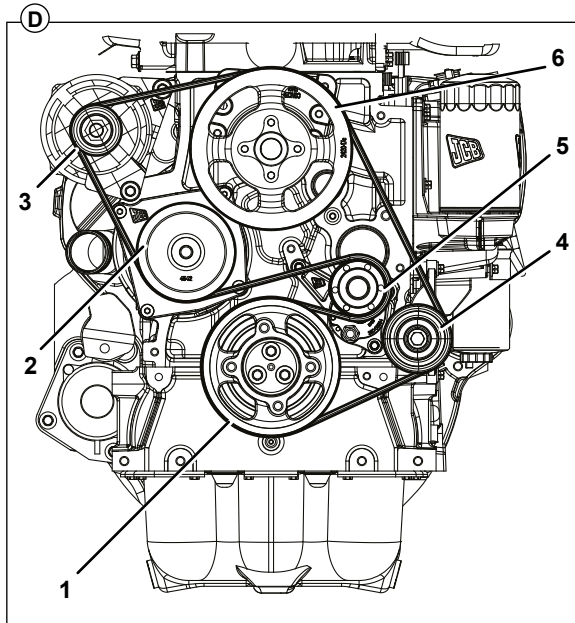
D - Without air conditioning compressor, cooling fan pulley installed
